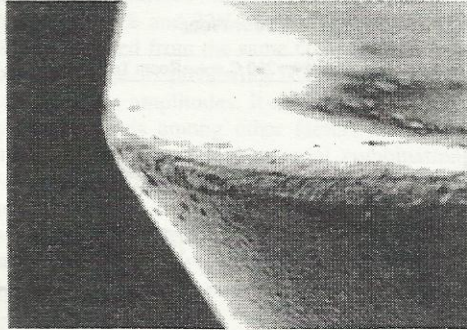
Pictorial view of the tool nose area after machining at preheated temperature of 260°C for case IV (Cutting condition: Cutting speed=300 m/min, depth of cut=2 mm and feed=0.2 mm per tooth)
